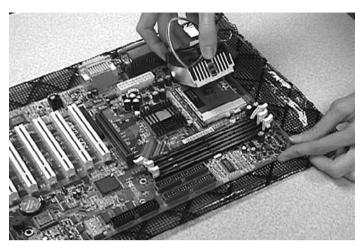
Heat Sink/Fan Assembly on the Motherboard
